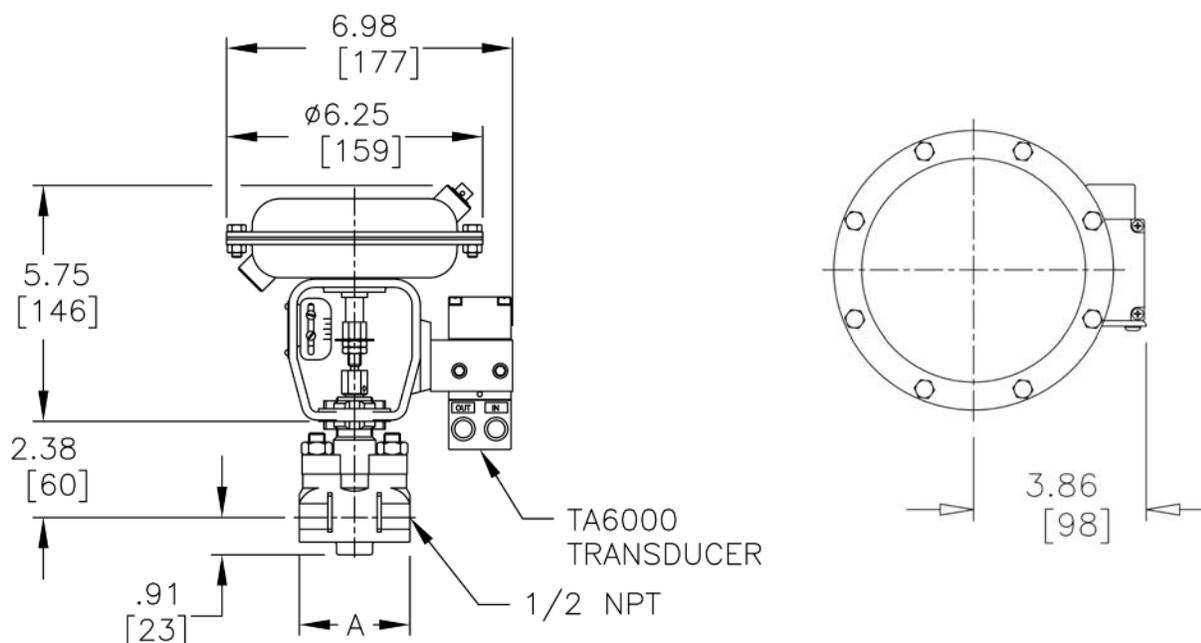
Dimensions - inches [millimeters] of Type 16 Actuator with TA6000 Electropneumatic Transducer (Top View on Right)
